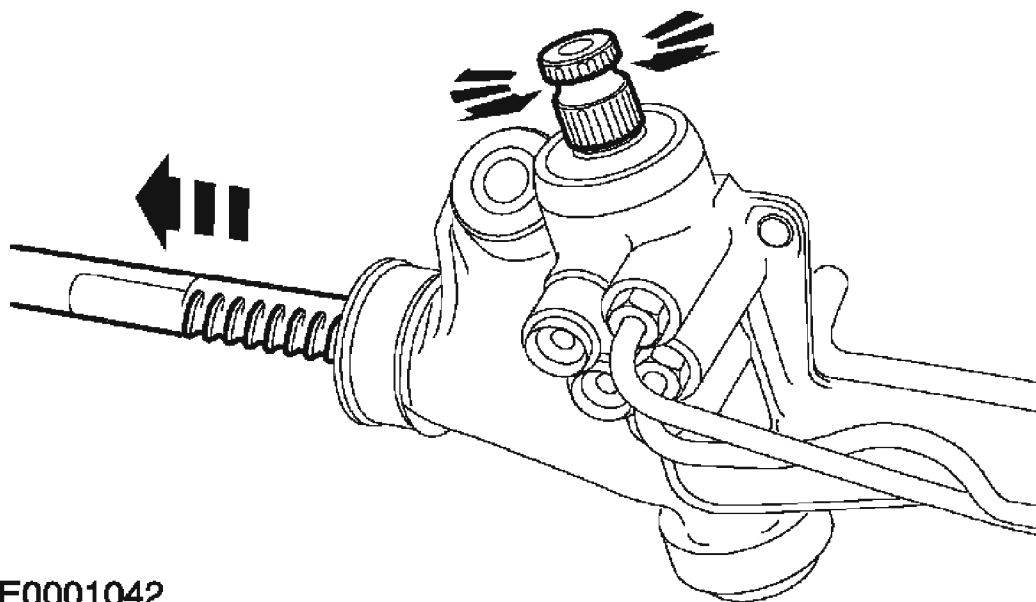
Rotating Pinion To Expose Rack Gear Teeth
